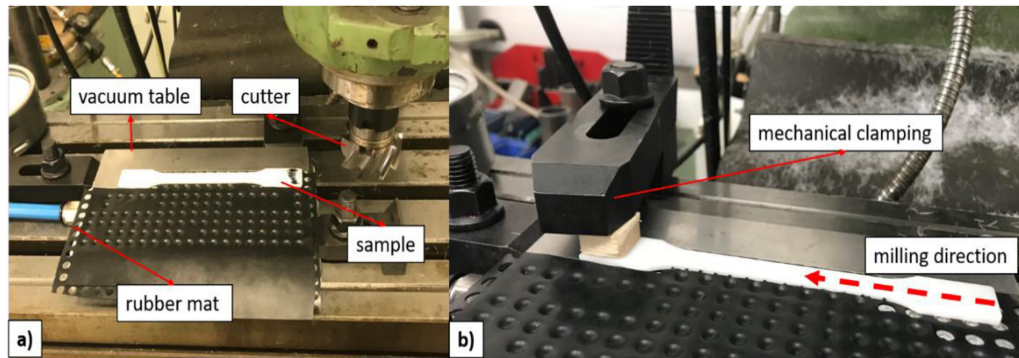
Fixation used for milling of the specimens a) with vacuum only and b) with vacuum and additional mechanical clamping.
